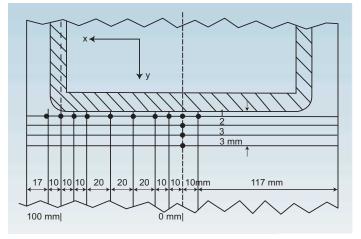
Top view of a flat test plate: cover plate (inner rectangular segment), weld (hatched area), and base plate underneath. Part of measurement mesh is shown by dots.
